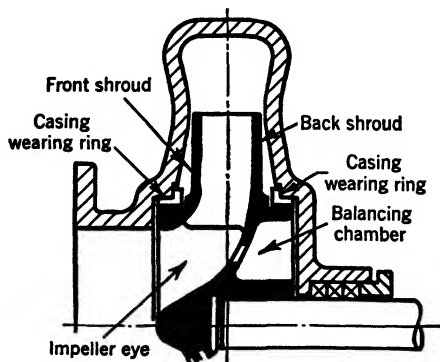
Single-suction impeller with a balancing chamber on the back.
